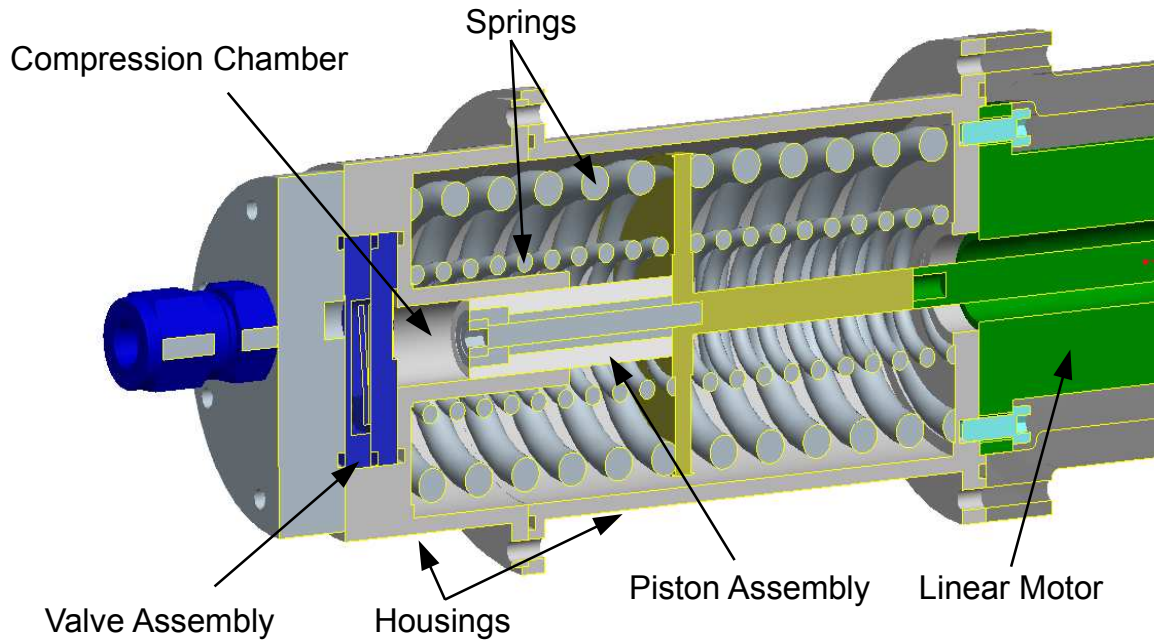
Sectional view of the prototype linear compressor built for this work.
